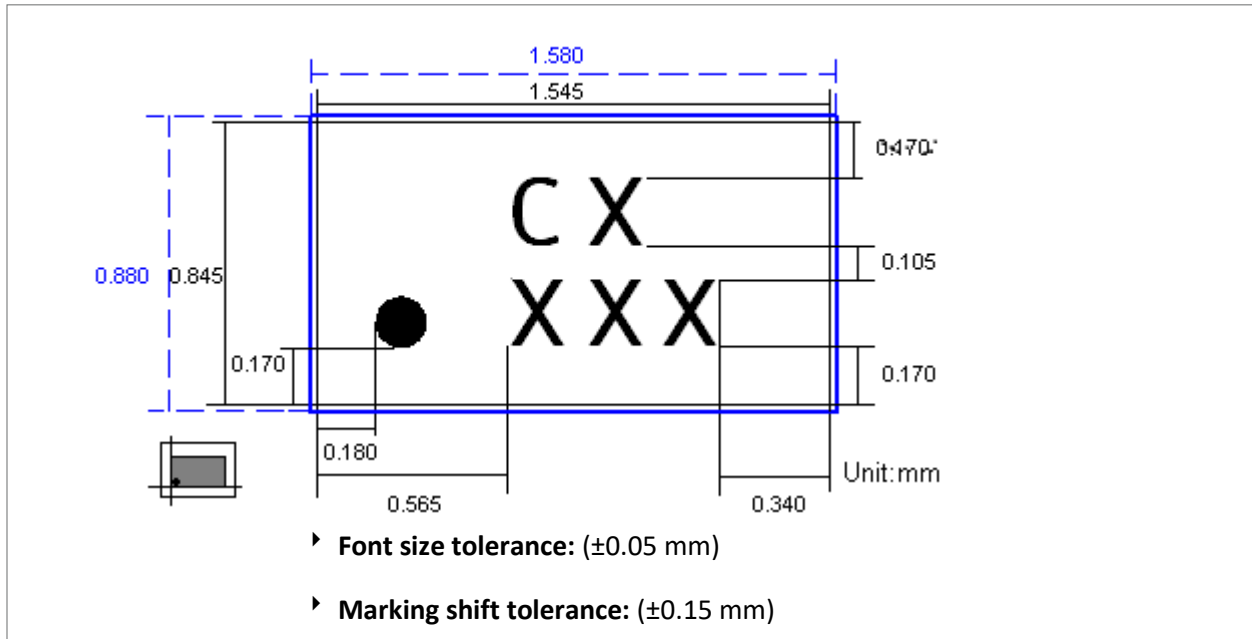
Standard Marking Dimensions for WLCSP Package (1.5 mm x 0.8 mm)
